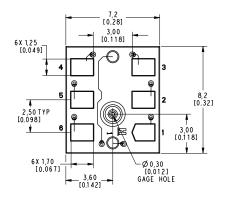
RECOMMENDED LEADLESS SMT PCB LAYOUT (FOR REFERENCE ONLY: MM/[IN]
